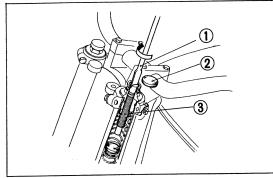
(1) Screwdriver (2) Robber cap (3) Adjuster
